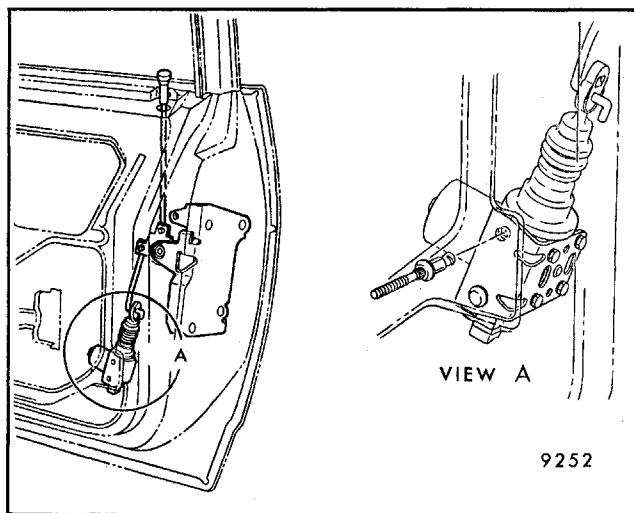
Power Door Lock Actuator - Typical Installation
